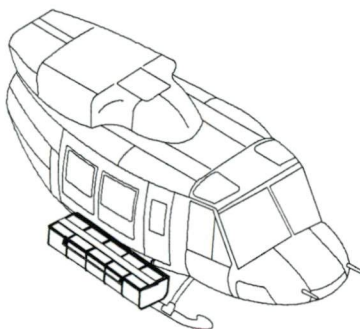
955 Extra Large Cargo Basket Installation
